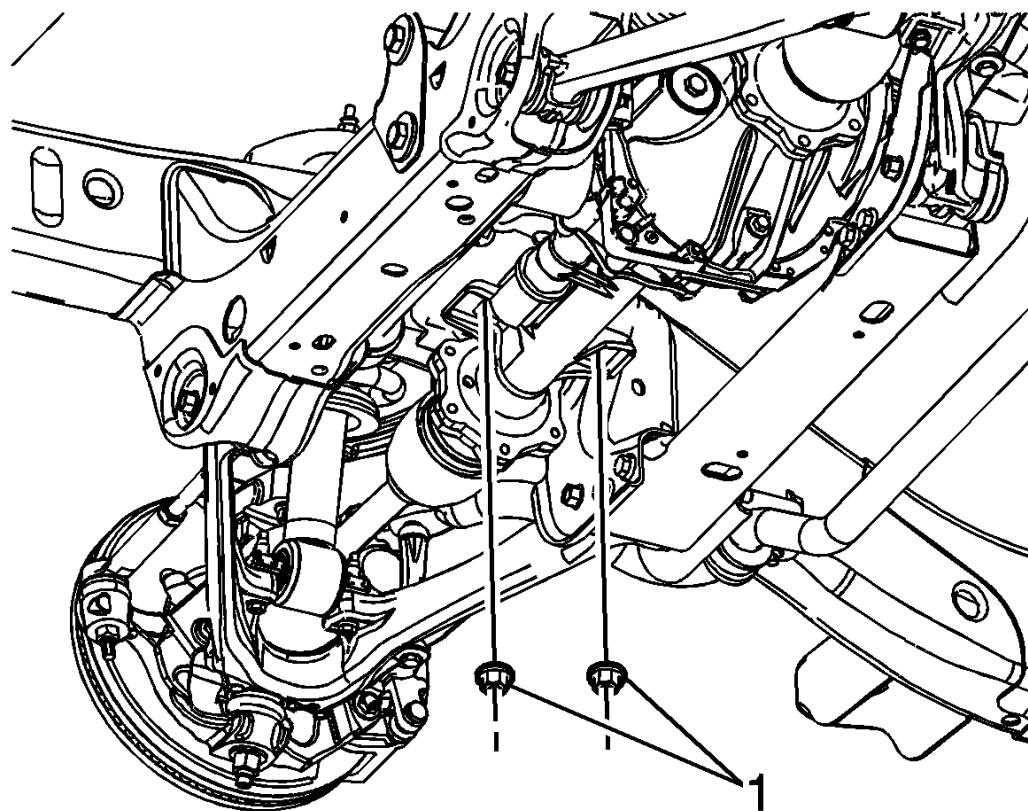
View Of Right Differential Carrier Mounting Nuts & Washers
